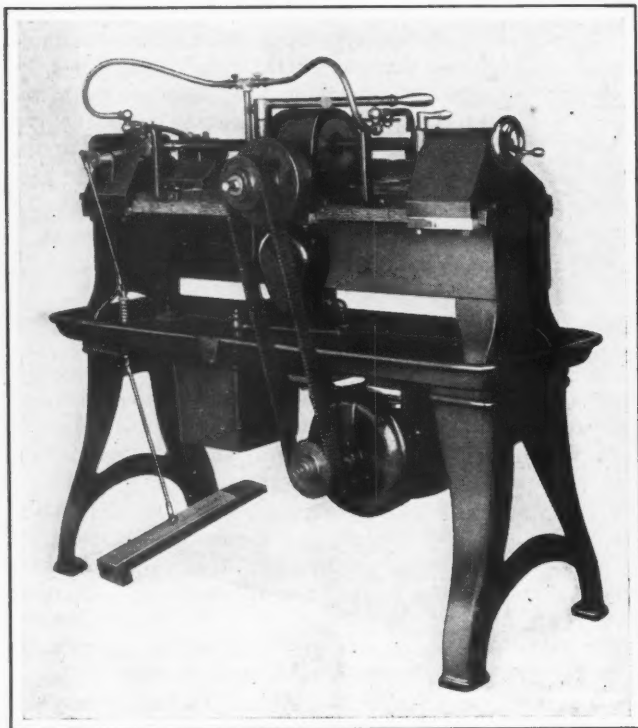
Porter-Cable Center-drive Lathe for simultaneously turning Both Ends of Camshafts and Similar Work
